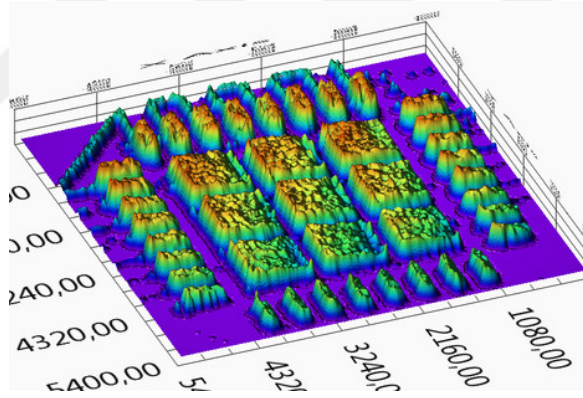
3D image of the solder paste on a PCB obtained by SPI machine. [4]
